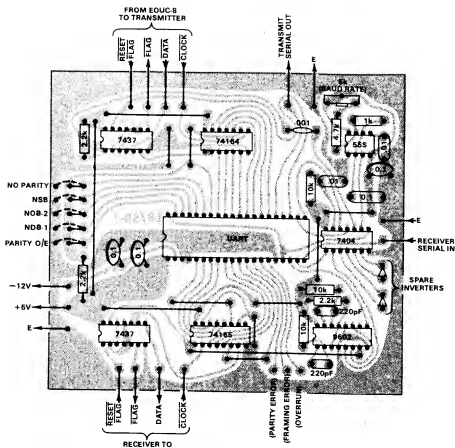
ASYNCHRONOUS INTERFACE PCB WIRING
